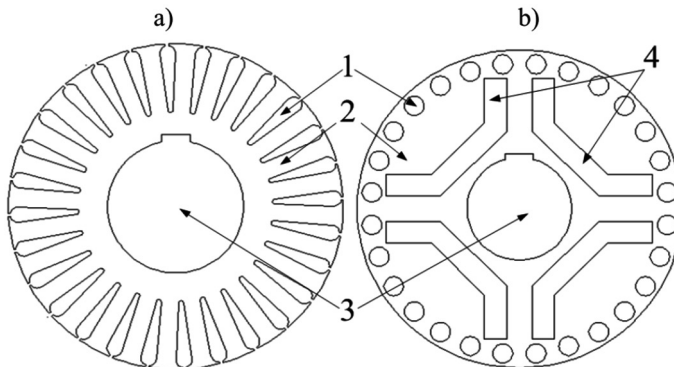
The structures of rotors: a) IM, b) LSPMSM (1 – rotor bars, 2 – rotor core, 3 – shaft, 4 – magnets)
